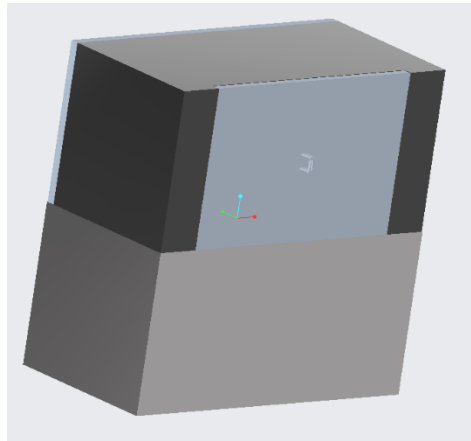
Rough CAD of Concept 3; The Full Enclosure.
